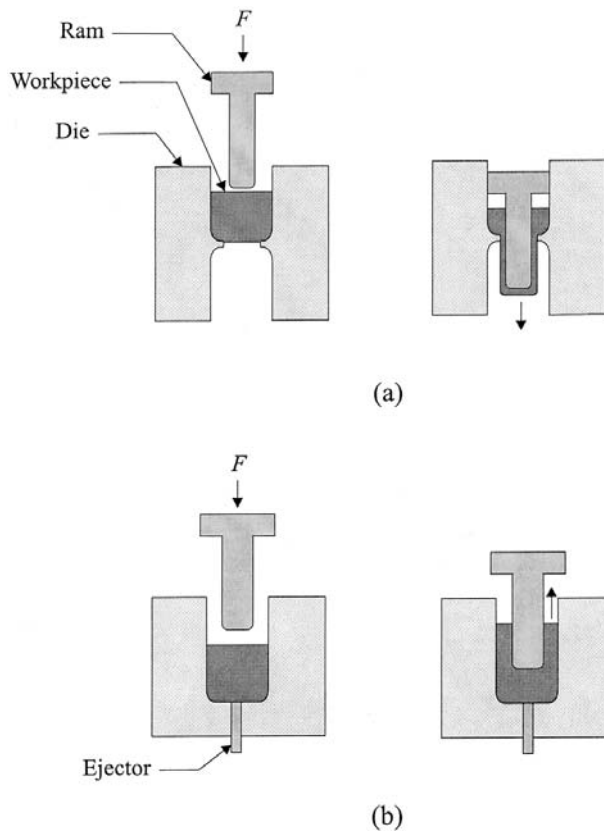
(a) Forward extrusion; (b) reverse extrusion forging.
